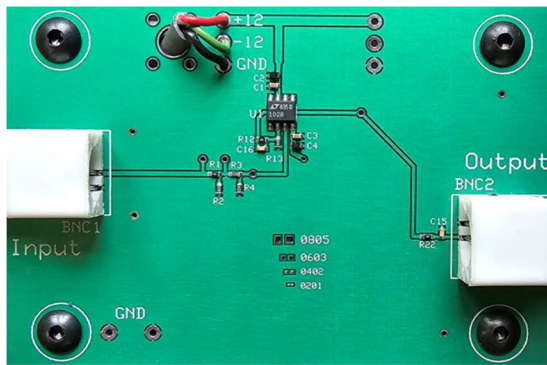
An LT1028 op amp mounted on a printed circuit board (PCB17).
